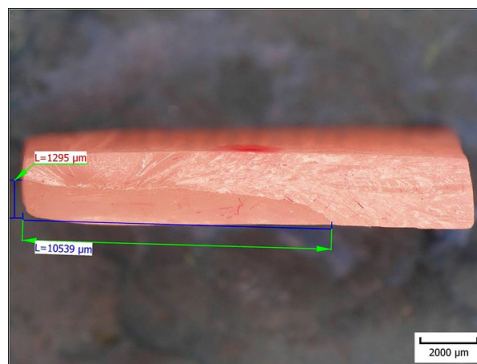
Transverse section, samples breaking: b. centrally and sideways
